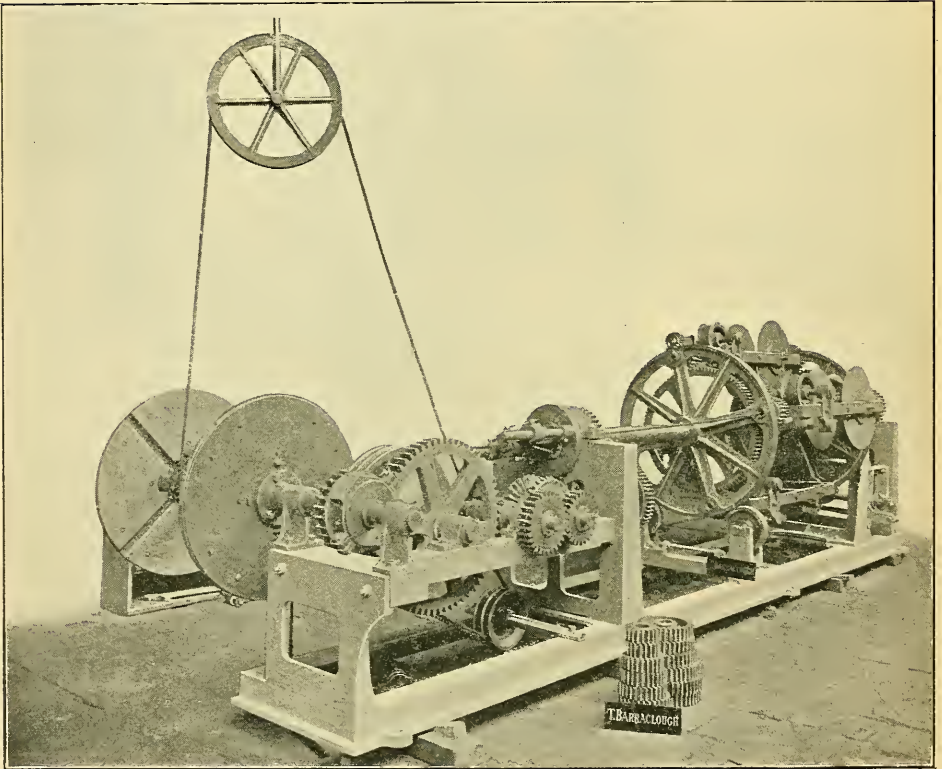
Horizontal 3- and 4-strand closing machine.
